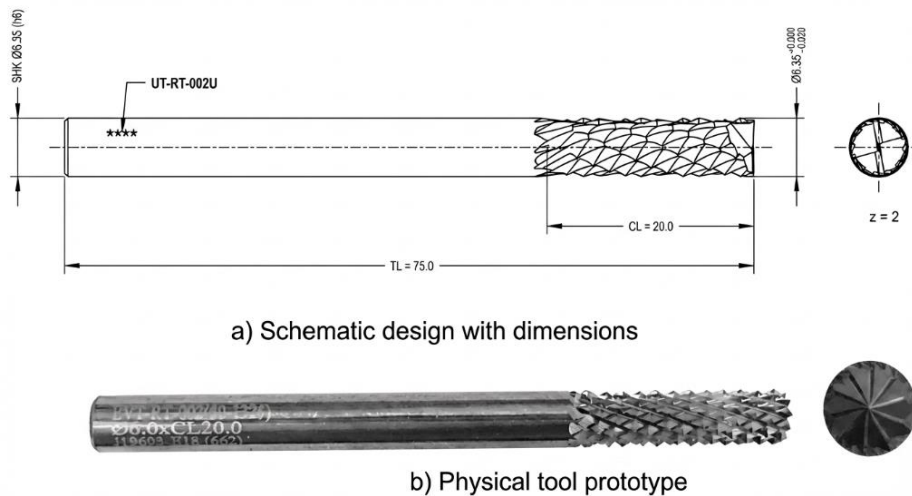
a) Router tool geometry, b) Actual router cutting tool
